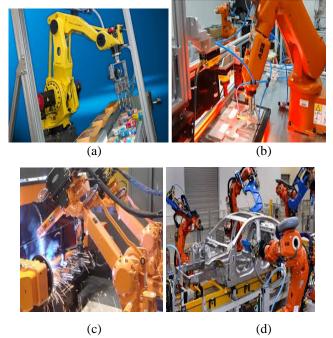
(a) energy saver robot for high-speed packaging.; (b) ABB Robots environmental application to spraying, gluing and wiping; (c) The fourth generation advances welding system ; (d) FANUC M-1iA Robotics high-speed assembly robots.[6].
